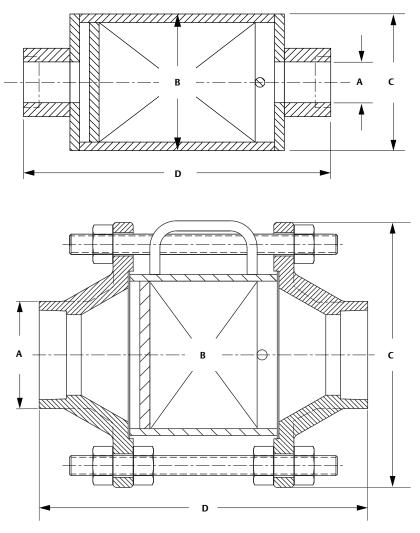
Threaded In-Line Flame Arrestor Dimensions
